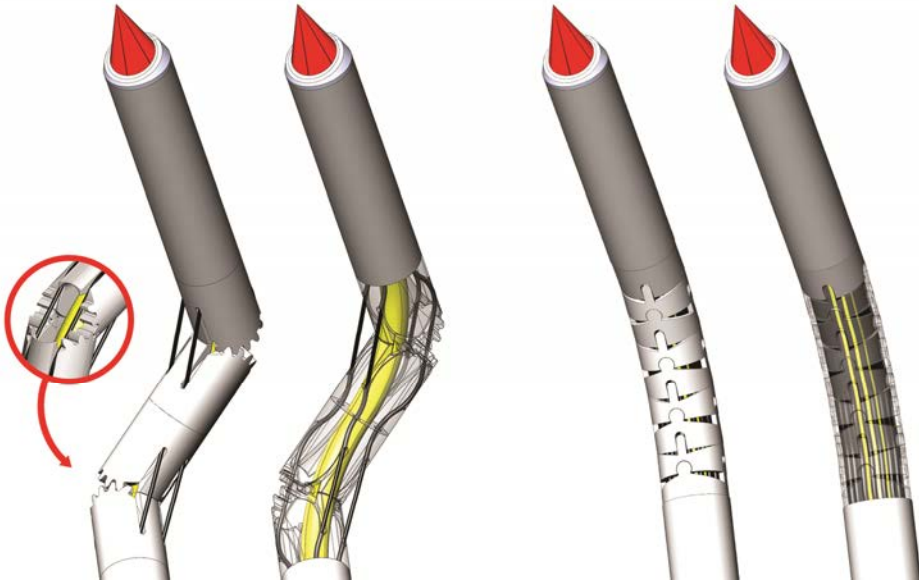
Feasible steerable joint constructions: the additive manufactured rolling joint construction and the laser cut joint construction. Joints are actuated by steering cables (black).
